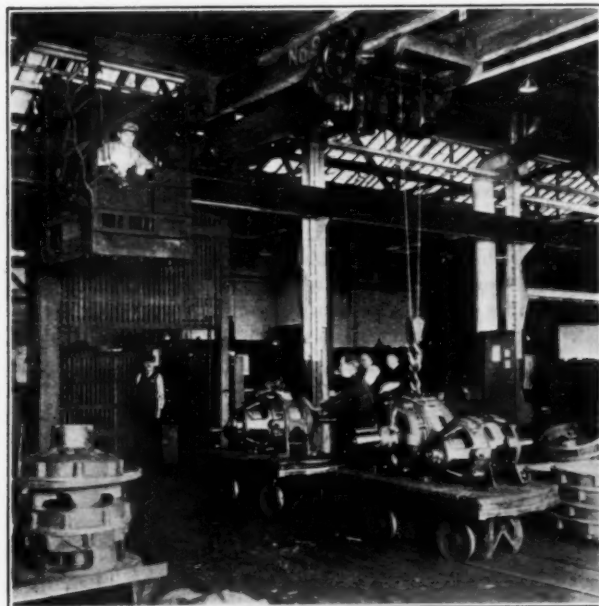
A COMBINATION OF MATERIALS-HANDLING UNITS; CRANE, INDUSTRIAL RAILWAY, AND ELEVATOR
